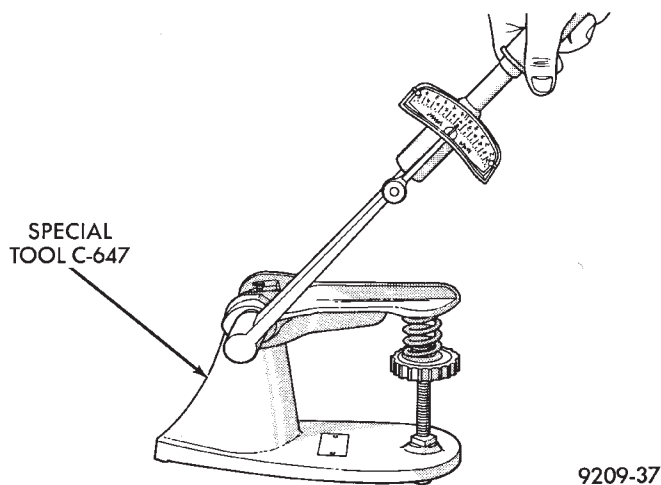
Testing Valve Spring for Compressed Length with Tool C-647
